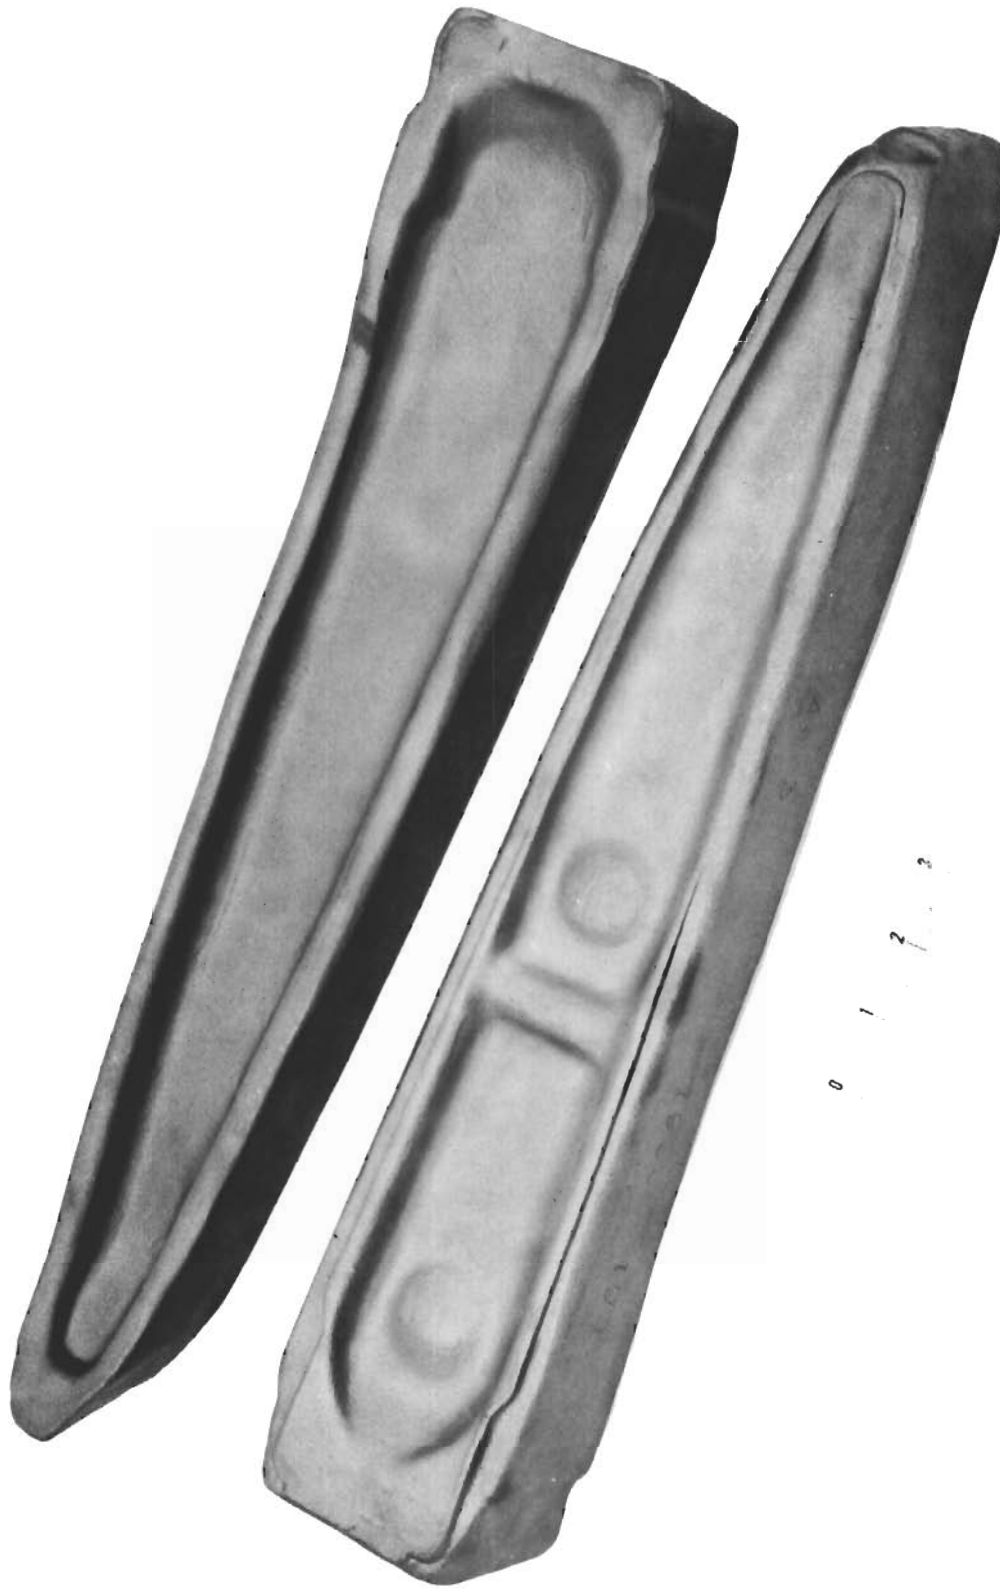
Both Sides of Inconel 718 Intermediate Stage Forging Produced with 6000 Ton Hydraulic Press in Modified Blocker Die Impression. Used in Production of Workpieces Subsequently Finish Forged with 6000 Ton Press and Delivered to TRW.
